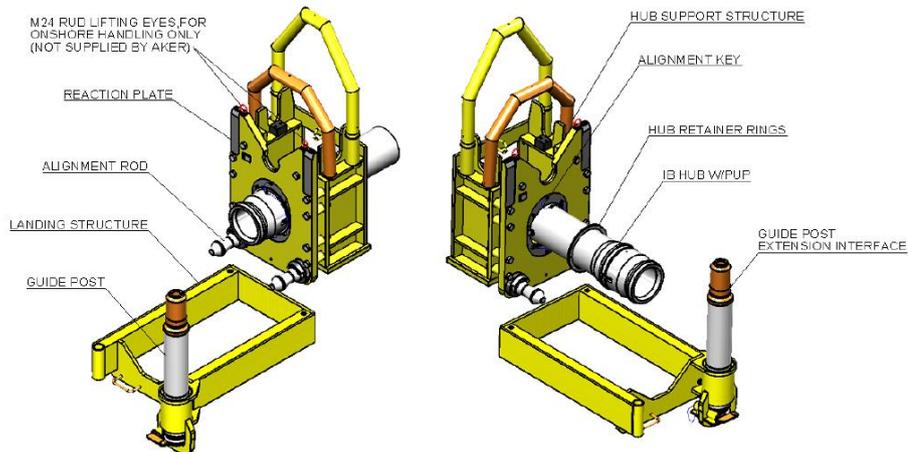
AKSO Horizontal Connection System (HCS) Outboard End, Rigid type
